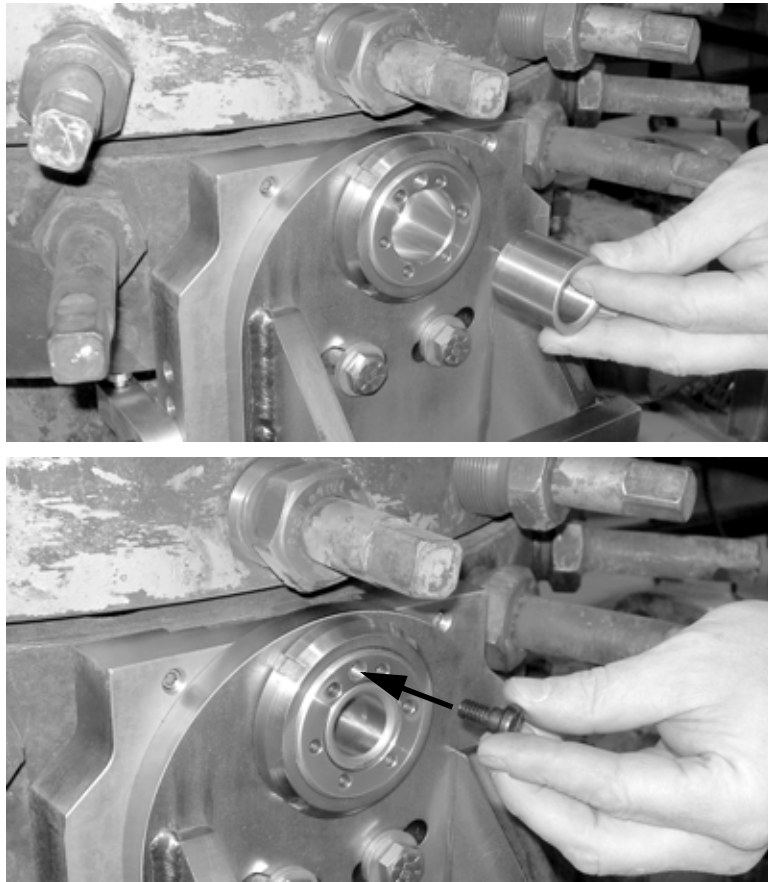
Insert the 1" collar into the gland adapter (top), then put in the lock screw to hold the collar in place (bottom).
